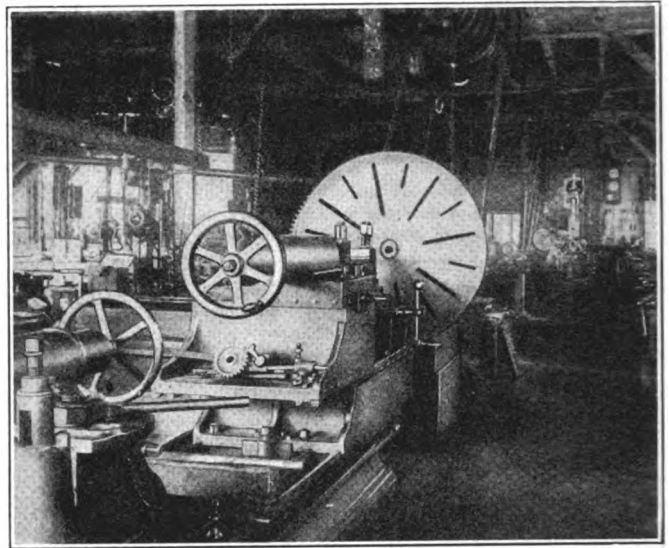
VIEW OF LATHE FROM TAILSTOCK END
